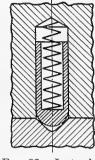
Instead of a ball, a hollow plunger is used which accommodates the spring. The end is hemispherical.
